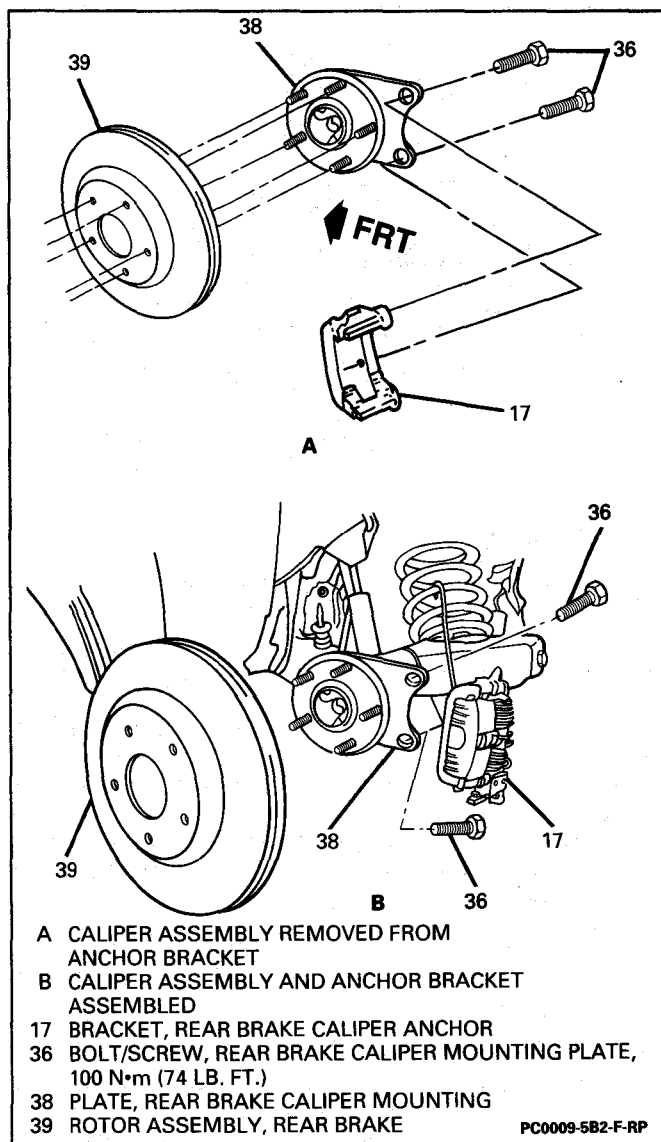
Rear Brake Rotor Assembly, Caliper Anchor Bracket, and Mounting Plate
